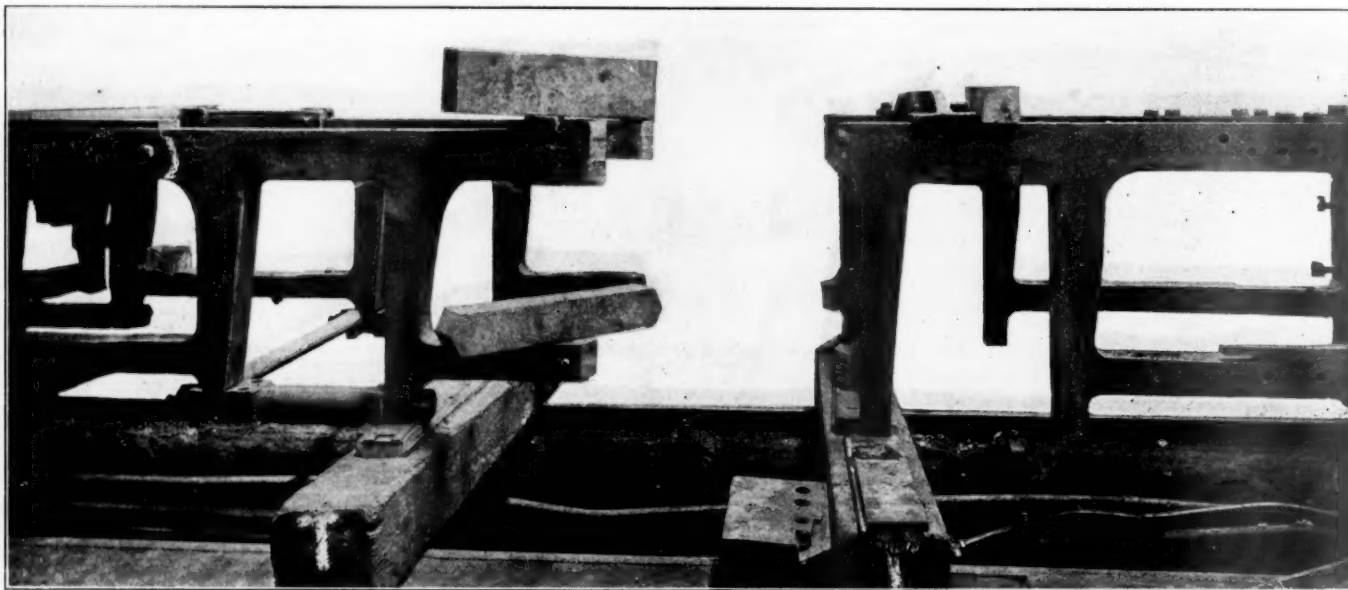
The Frames Ready for Welding in the Additional Material Between the Second and Third Drivers
